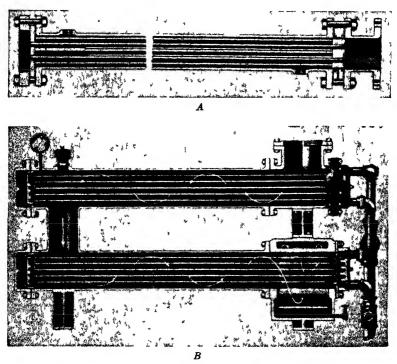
A, Single-pass and B, double-pass aftercoolers.
